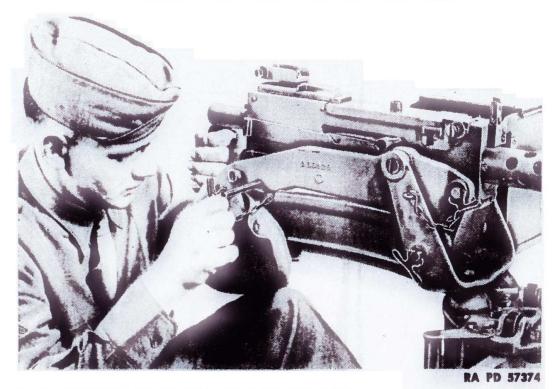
Securing Rear of Cal. .30 Machine Gun to Truck Mounts M36, M37, M37A1, and M37A2
